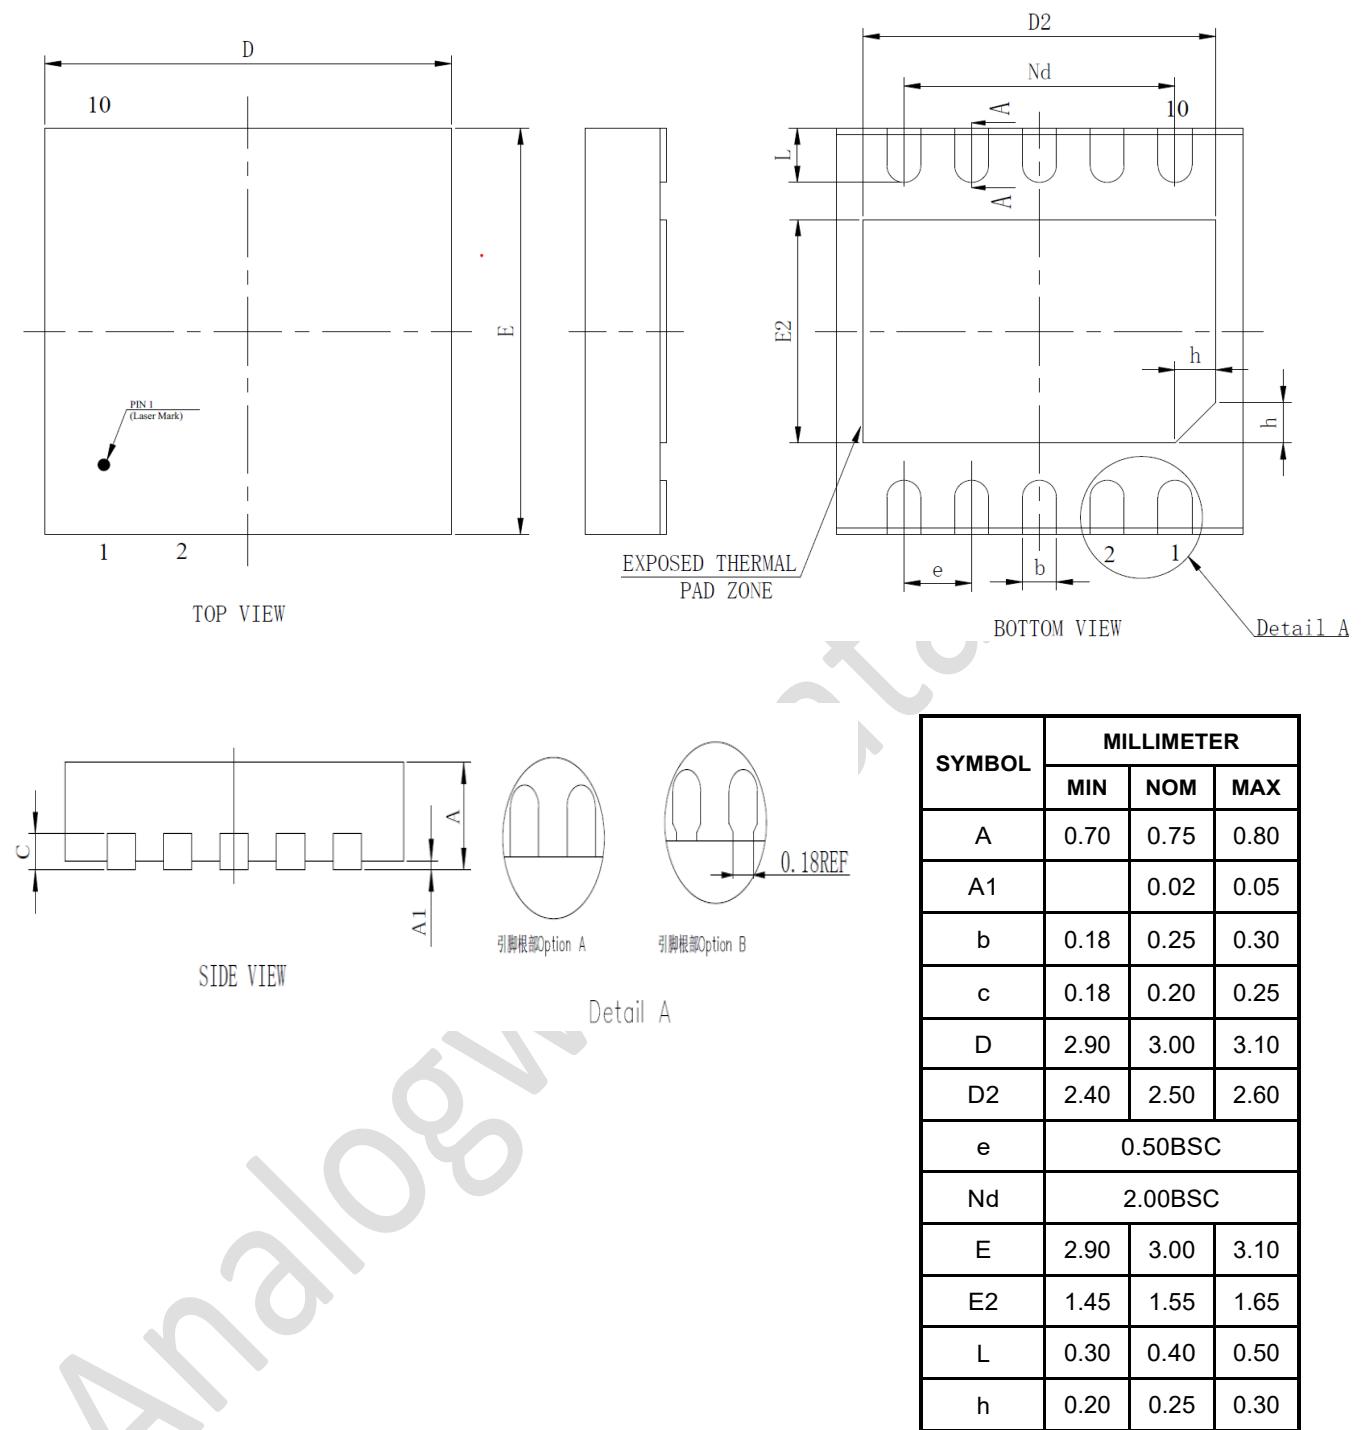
DFN3x3-10L Package, 3 mm × 3 mm Body
